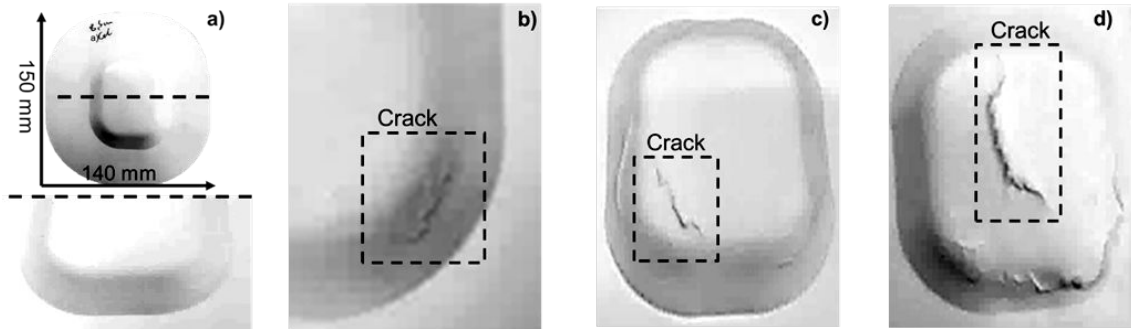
The fracture behaviour of the formed parts compared with parts without cracks (a), with a crack in the top layer at the flange (b), with a crack through several layers on the top (c) and with a crack through the whole thickness (d)
